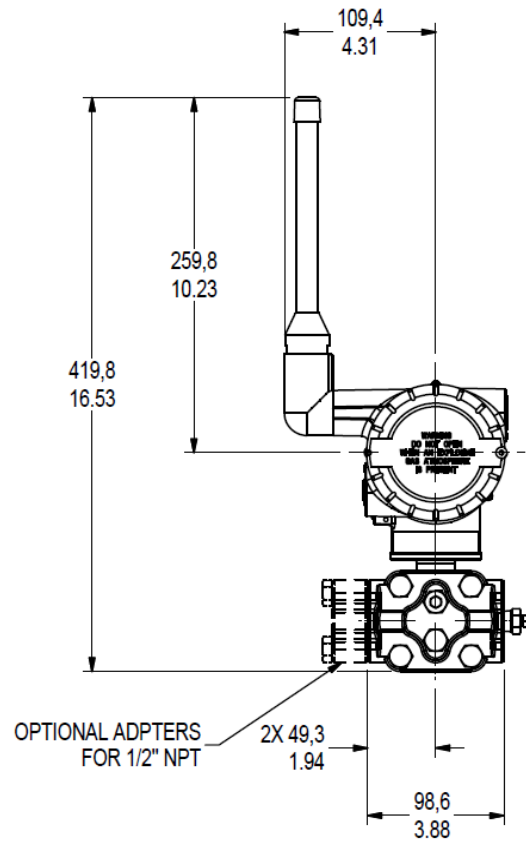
Dual Head, typical mounting dimensions for STAW740 (4 dBi antenna shown)
